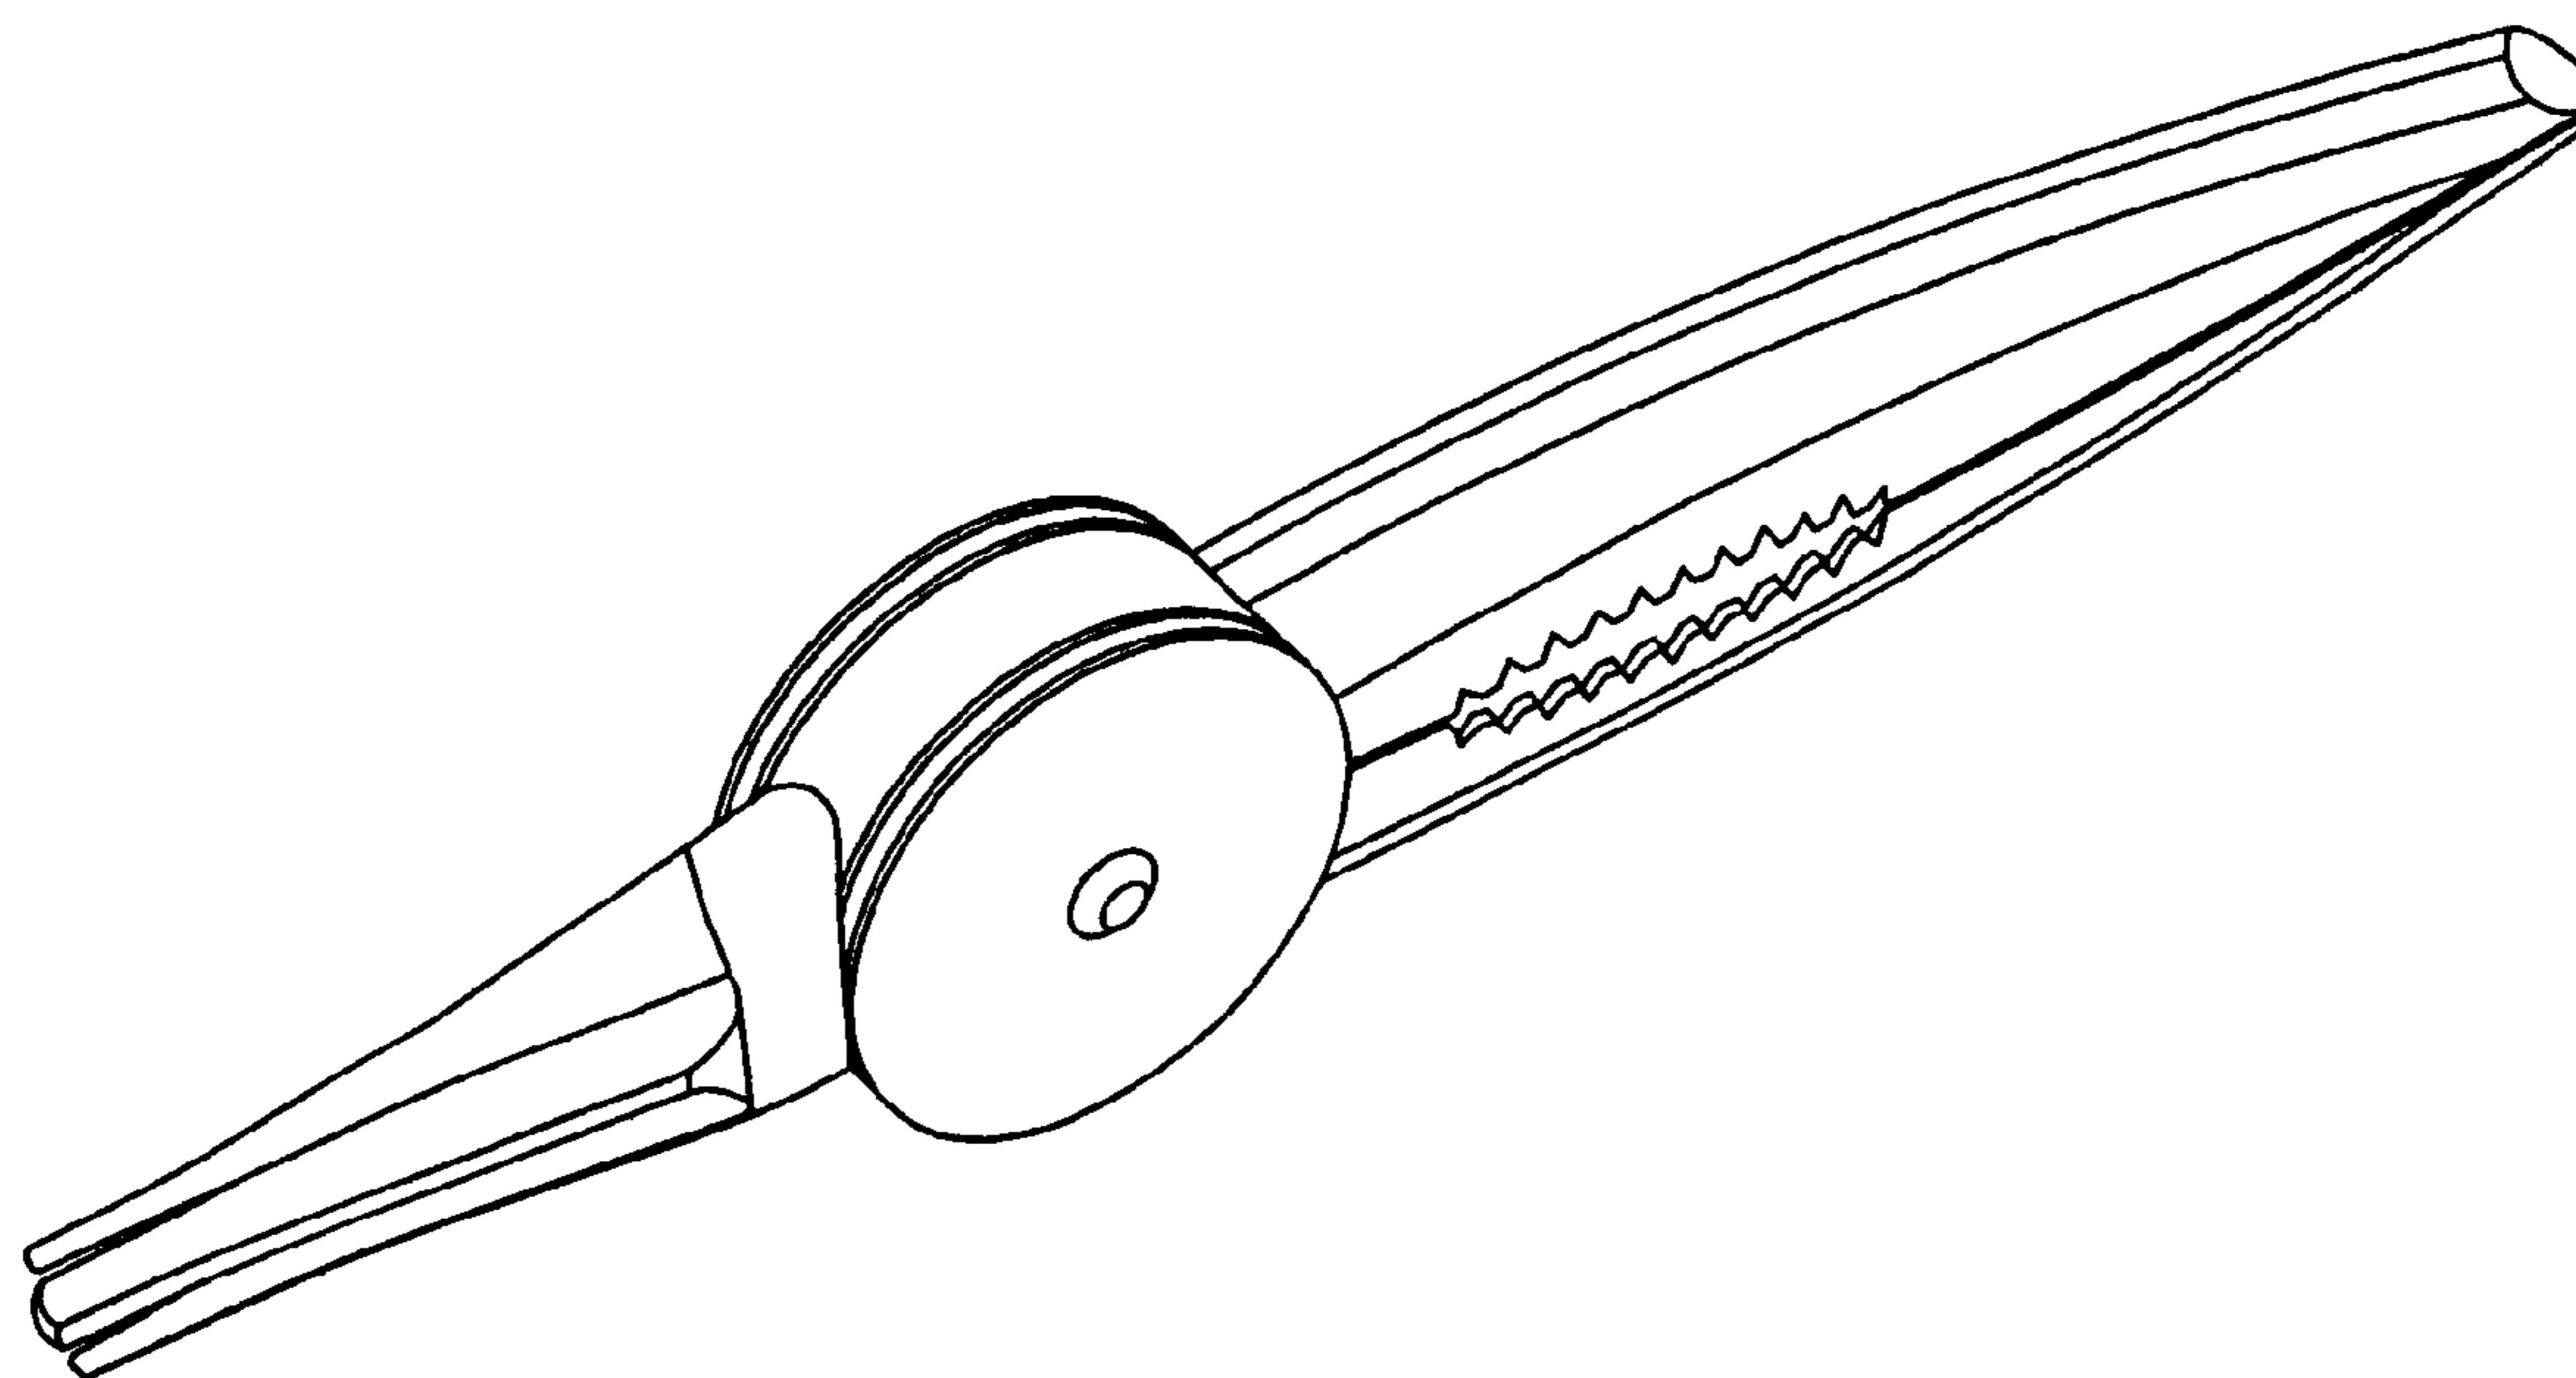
is a perspective view of a squid-shaped crab claw cracker tool of the present invention.
